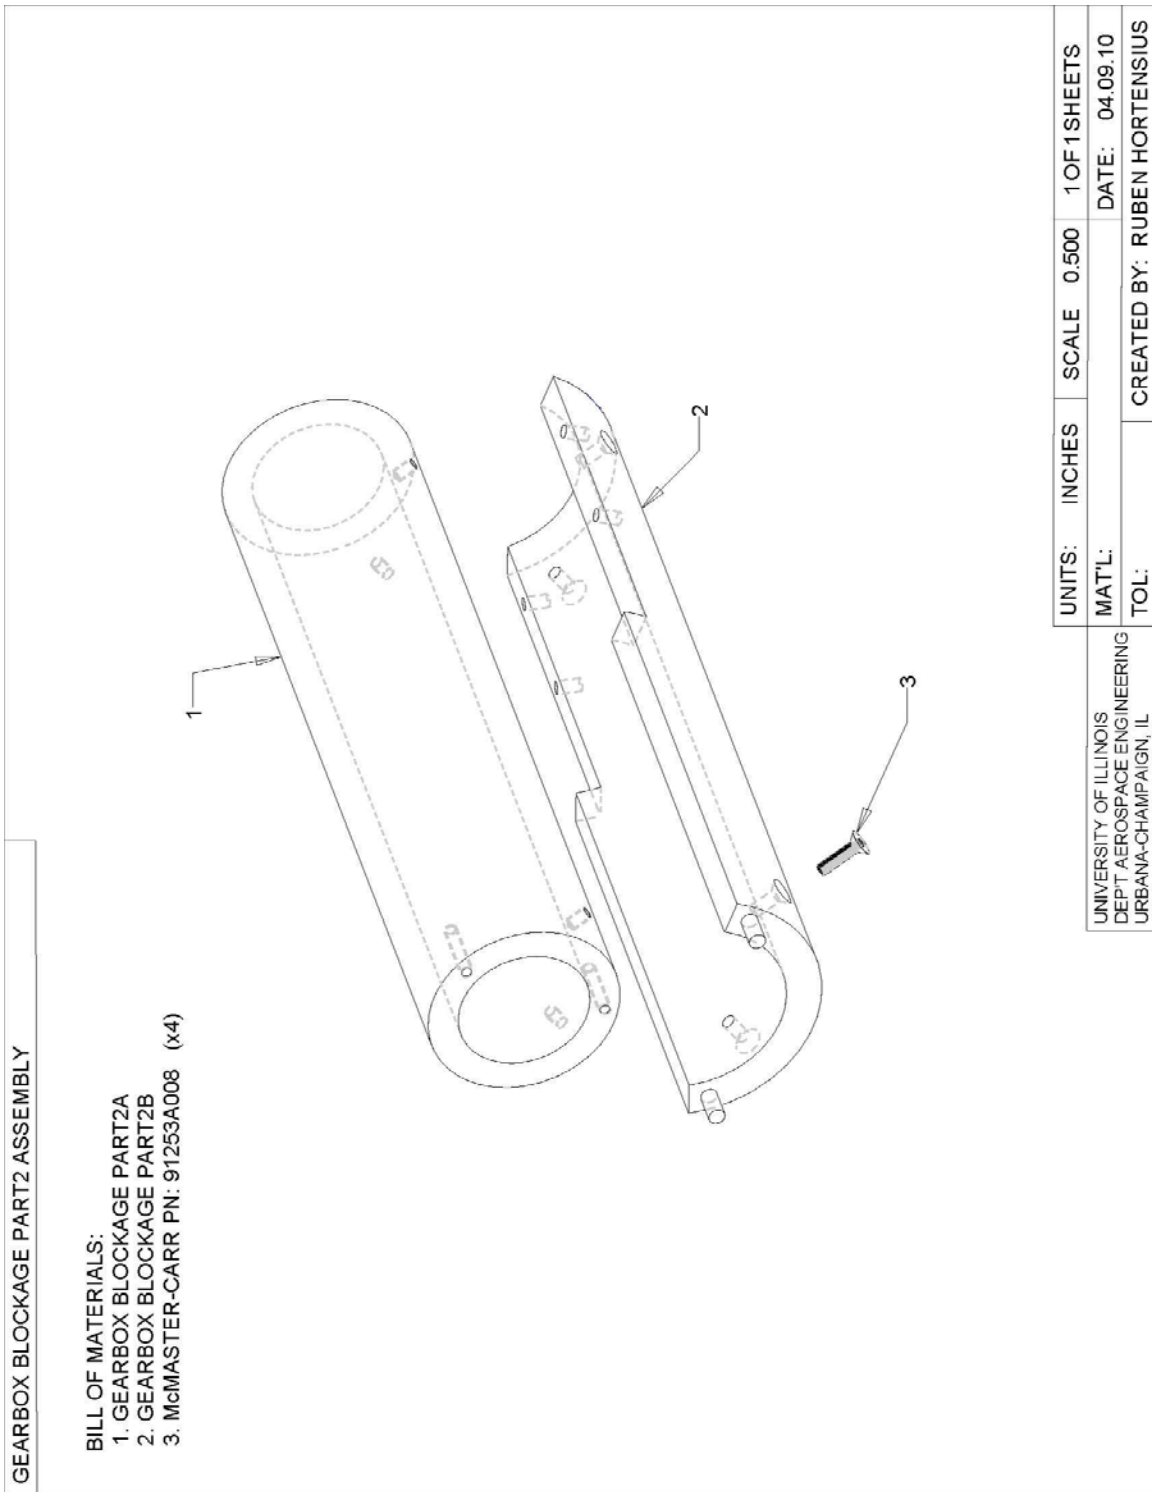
Gearbox Blockage Centerbody Subassembly Drawing.
